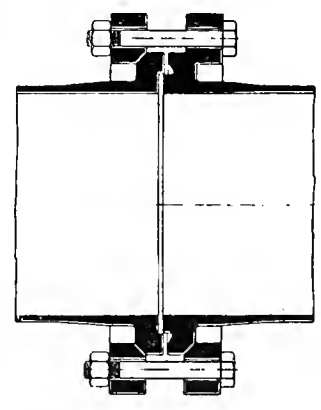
Loose Flanges and Welded on Borders Used on Specials and Elbows.
